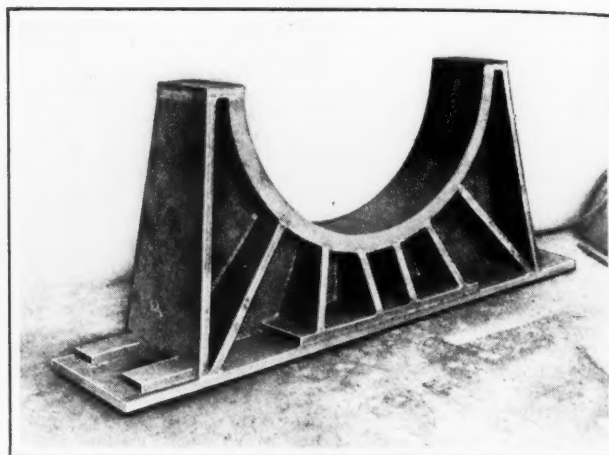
Pedestal Type Bearing Base of Cut and Welded Steel Plate Construction
